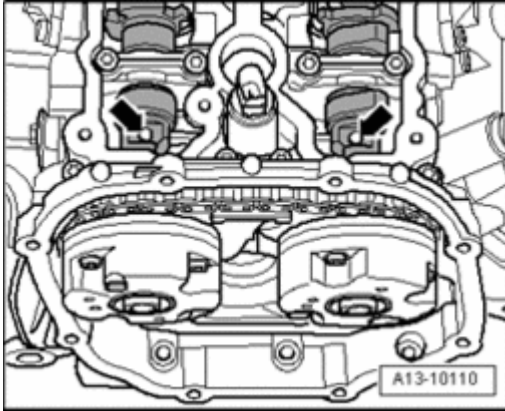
Identifying Threaded Holes In Camshafts Must Face Upward
